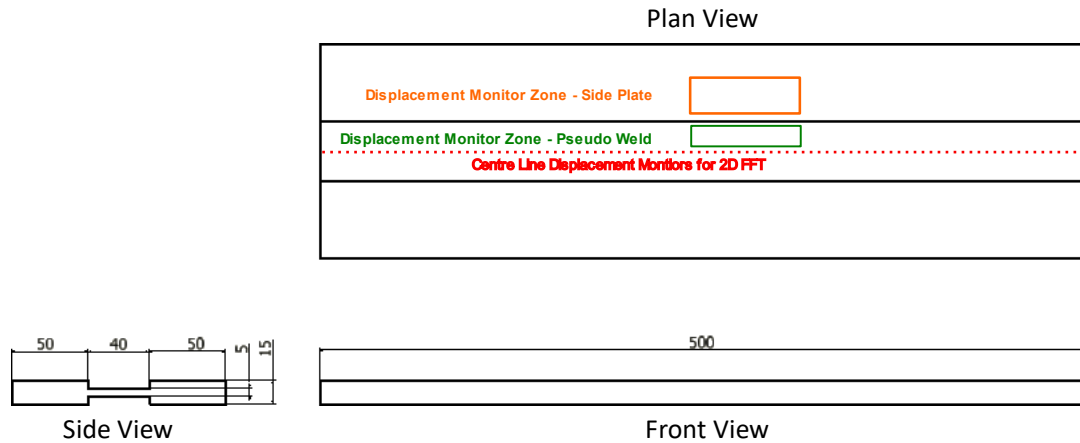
Pseudo weld 3rd angle projection schematic in mm
